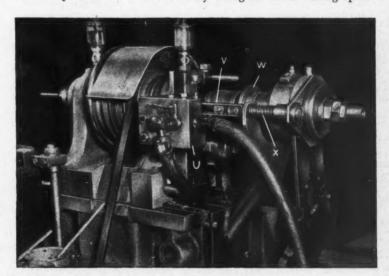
The point at which the thread-chasing tool is retracted from the work, and the follower is disengaged from the leadscrew, is controlled by one of two adjustable rollers on the slide V, which operates a rotary air valve in the housing U
